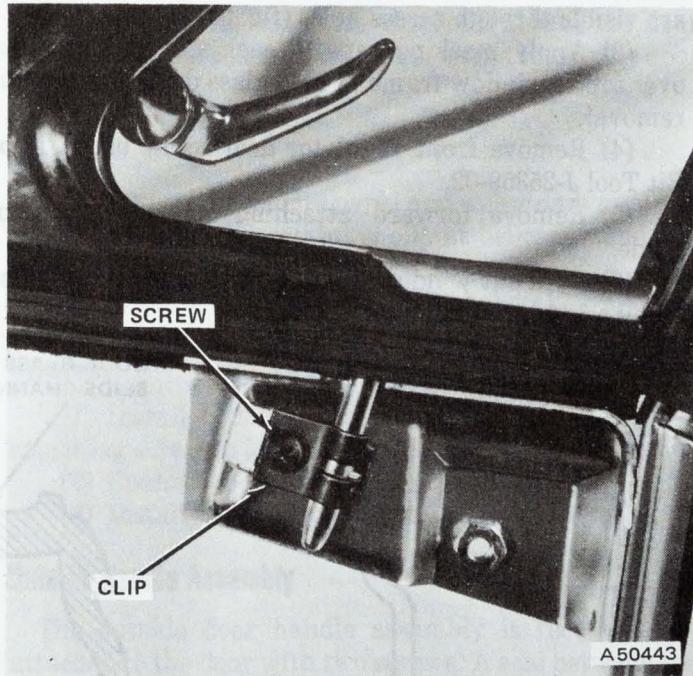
J-11 Removing Lower Pivot Shaft—Pacer
